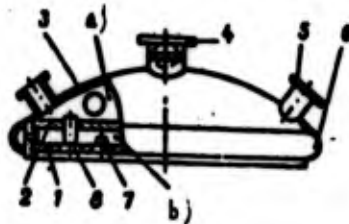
Diagram of an injector head. a) oxidizer cavity; b) fuel cavity. 1 - fire base; 2 - middle base; 3 - upper base; 4 - spherical support; 5 - nozzle; 6 - collector; 7 - fuel injector; 8 - oxidizer injector.
